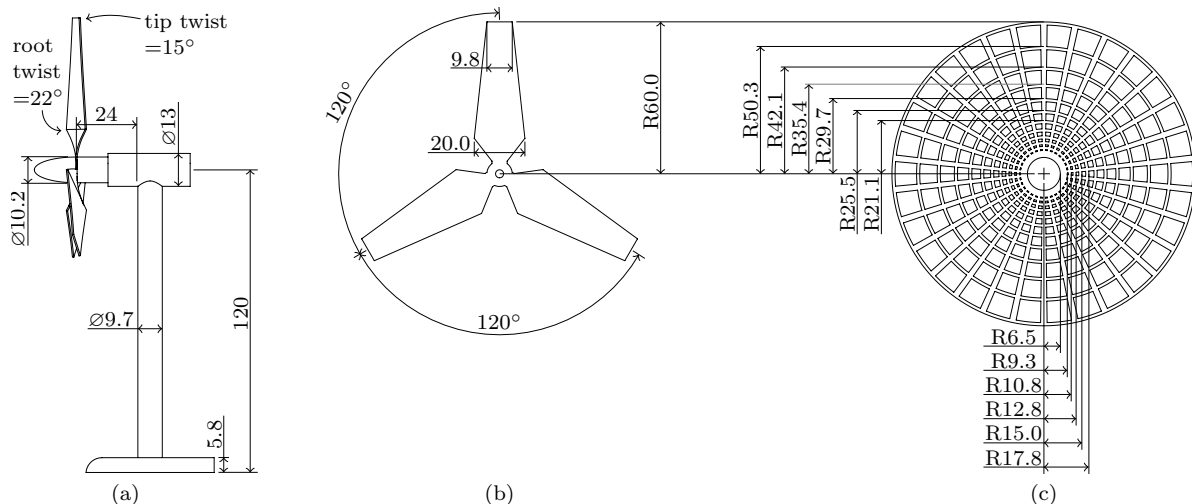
Scale drawings of the geometry of the (a) turbine model with pressed rotor, (b) rotor flat pattern, and (c) porous disk. All dimensions are in millimeters unless otherwise noted. The mounting adapter for the hub of the rotor and disk are is not shown.
